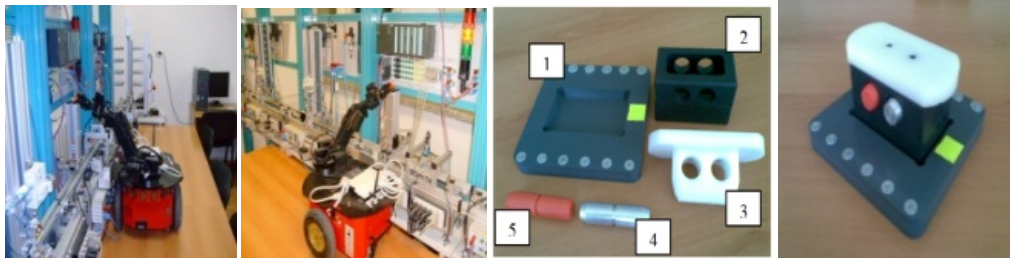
a) and b) assembly line, Hera, served by WMR, Pioneer 3-DX, equipped with RM, Pioneer 5-DOF Arm; c) parts; d) assembled product
